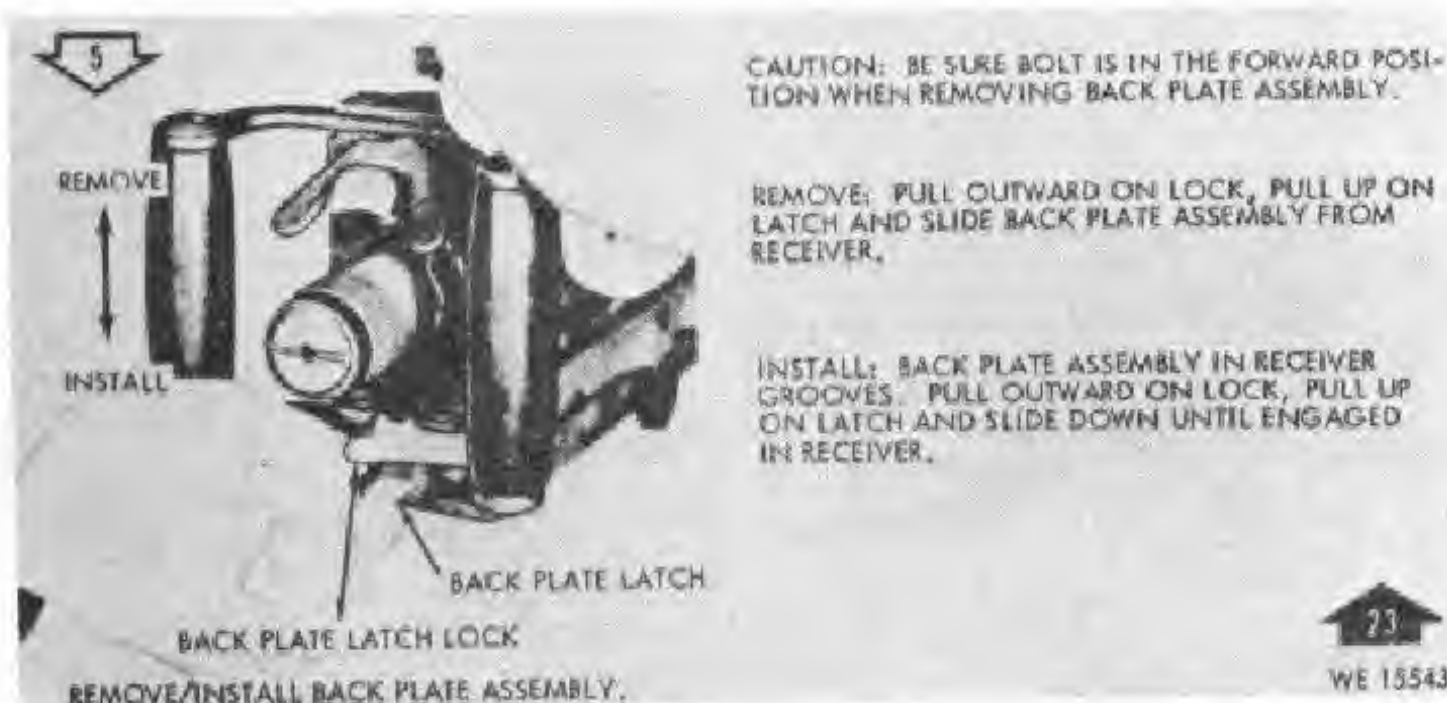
Disassembly/assembly of Caliber .50 Machine Gun, M2. (3 of 20)
